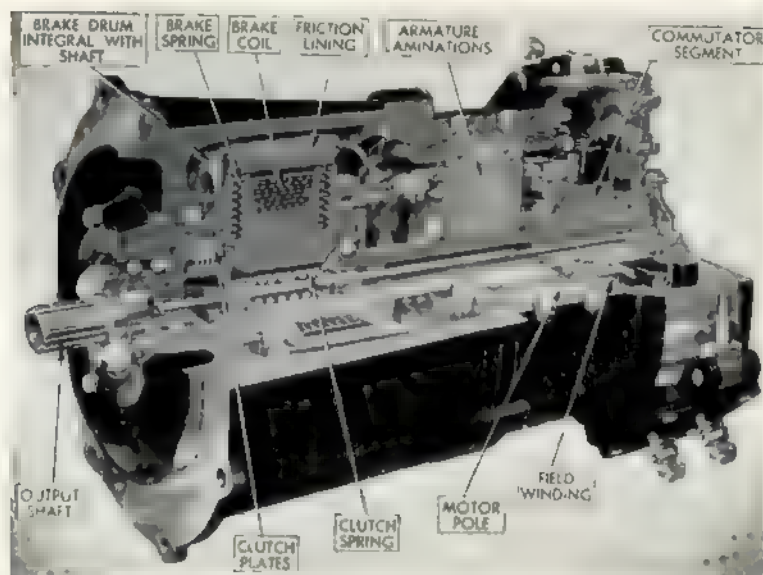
Reversible motor (9 h.p.) with built-in brake and clutch. Weight 26 lb.
